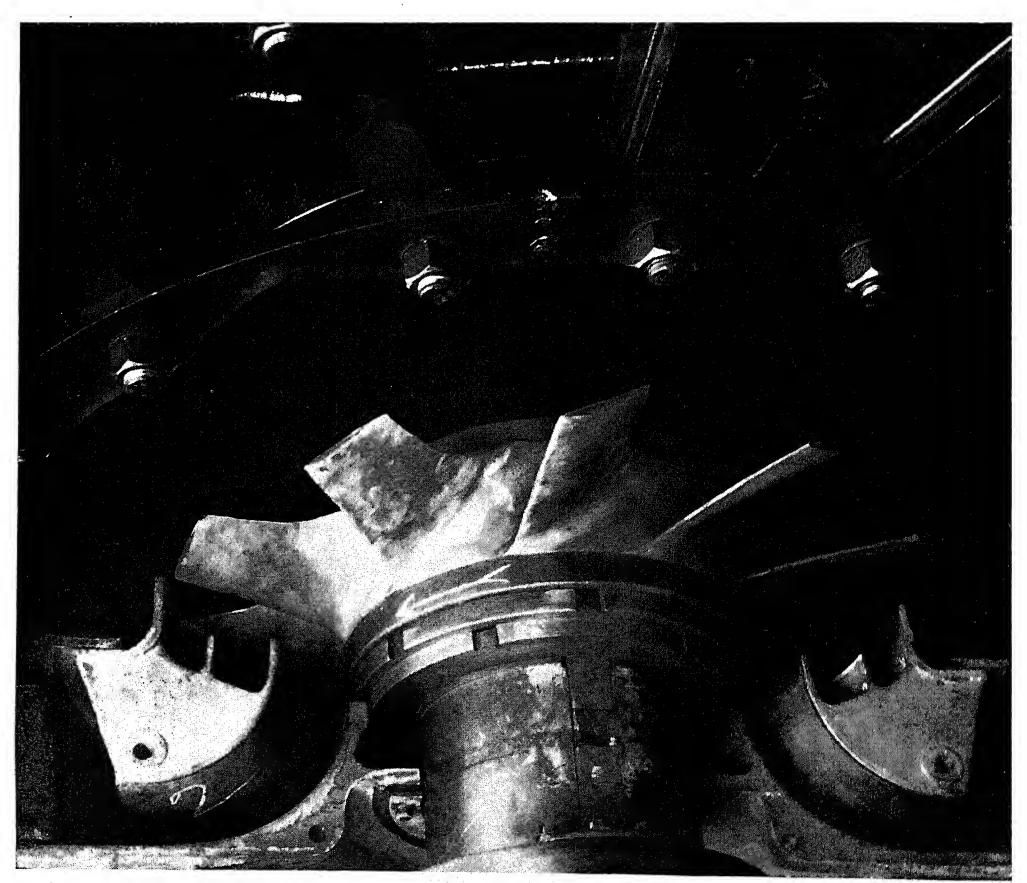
Close-up of turbo-alternator with part of air intake removed to show arrangement of propeller fan and guide vanes.
